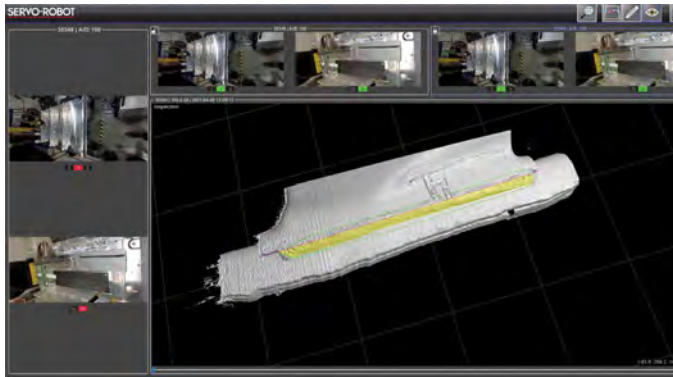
Human machine interface showing a weld surface map created by the vision system.
